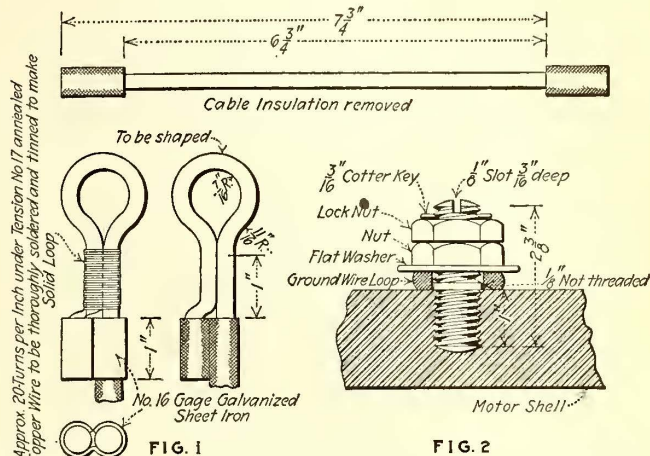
END OF CABLE LOOPED TO FORM A TERMINAL. FIG. 2—METHOD OF ATTACHING LEADS TO MOTOR SHELLS
